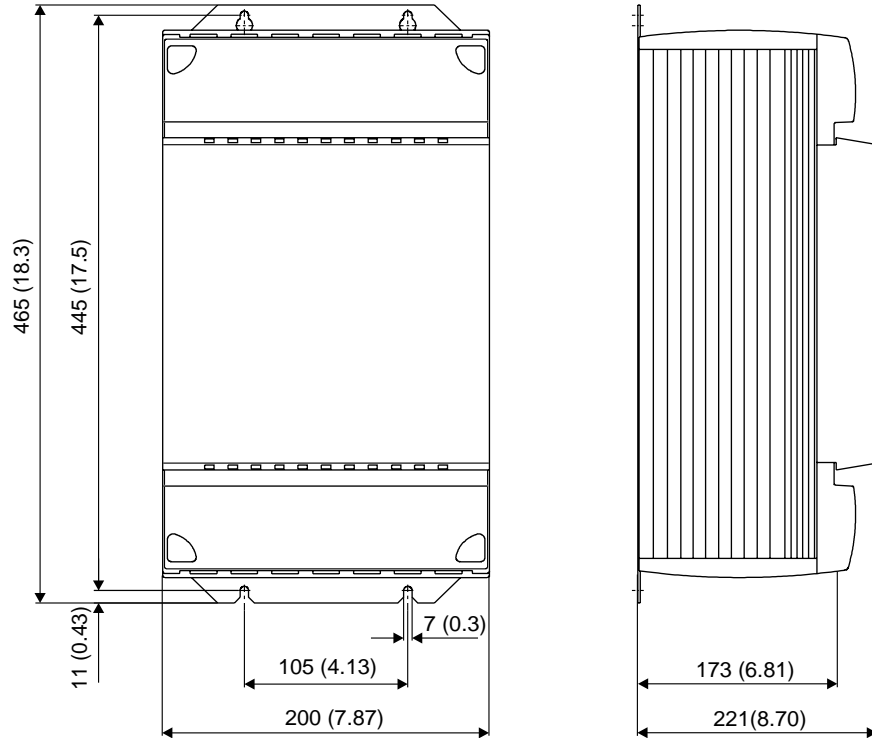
Dimension drawing, MDR60A size 3, dimensions in mm (in)
